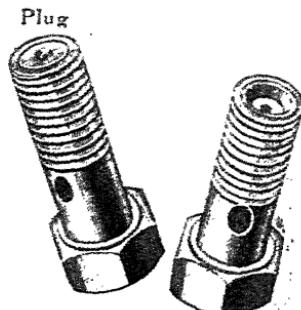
Main Metering Jets Used in the Stromberg Model "U" Carburetor
